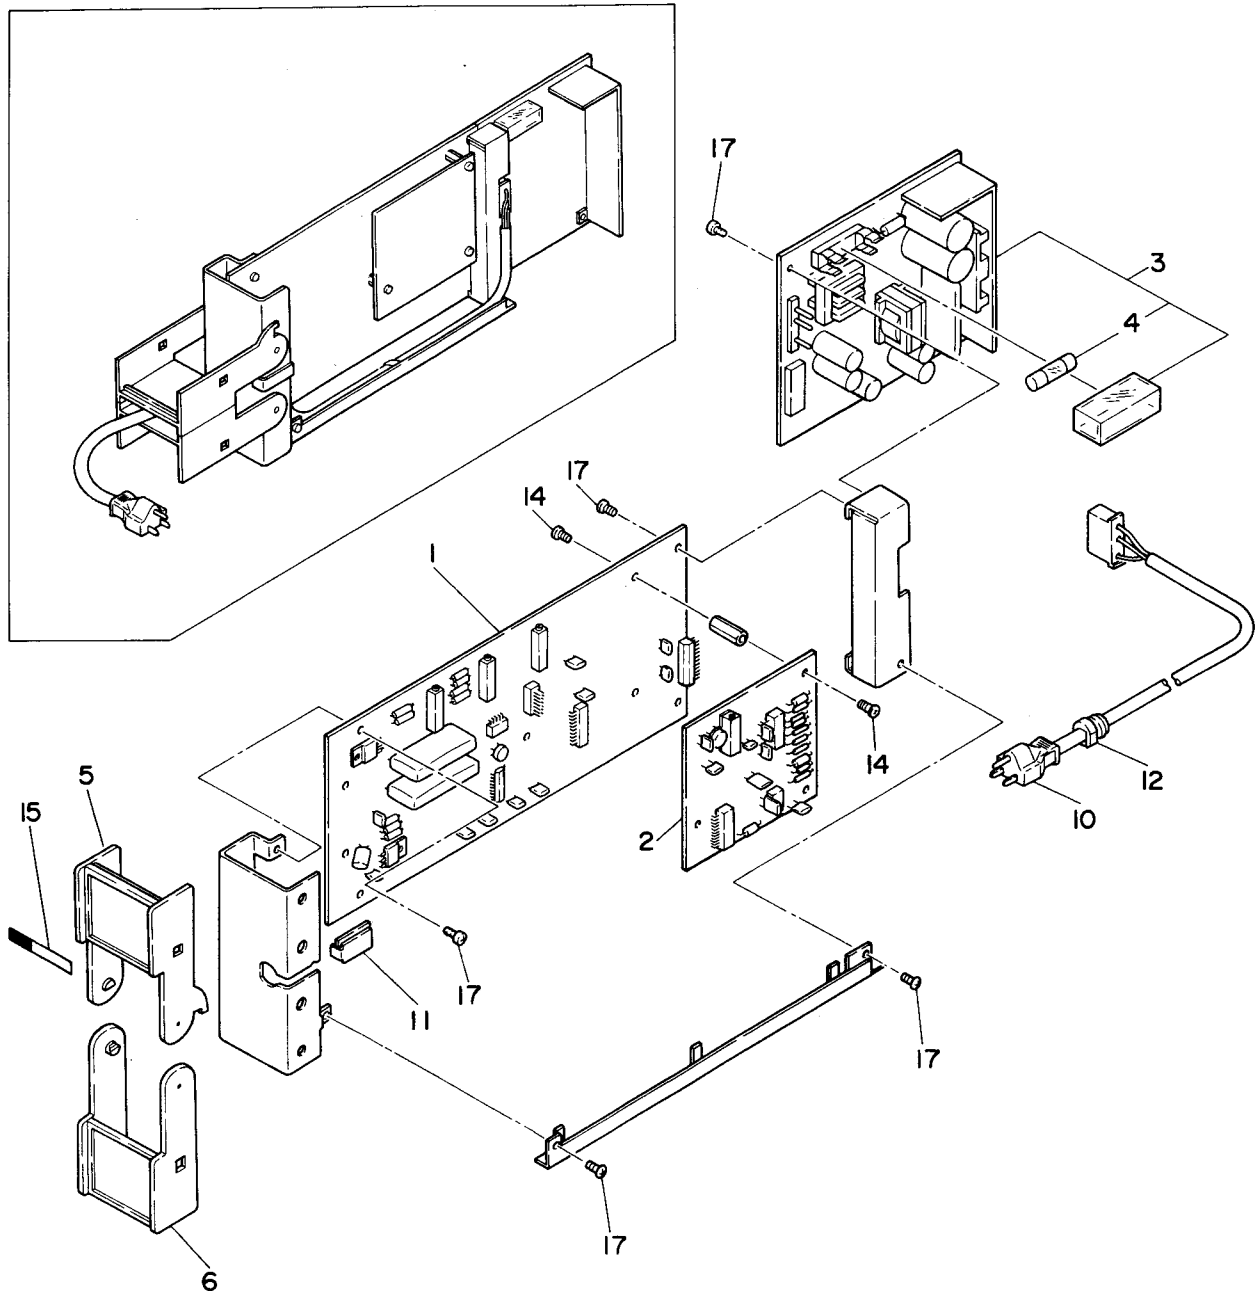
Disassembled View (SDBT-□ 11\*A).
